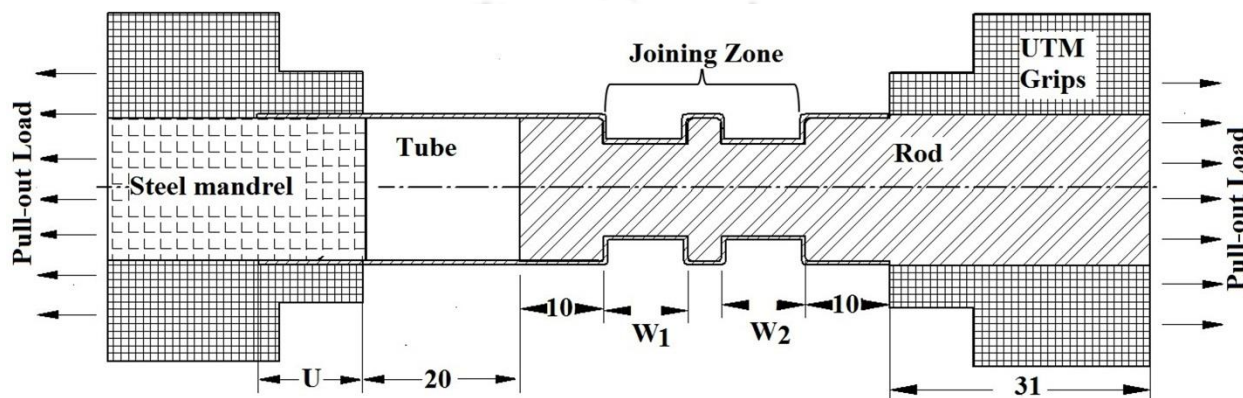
Schematic representation of pull-out test for a crimped sample (All dimensions are in mm)
